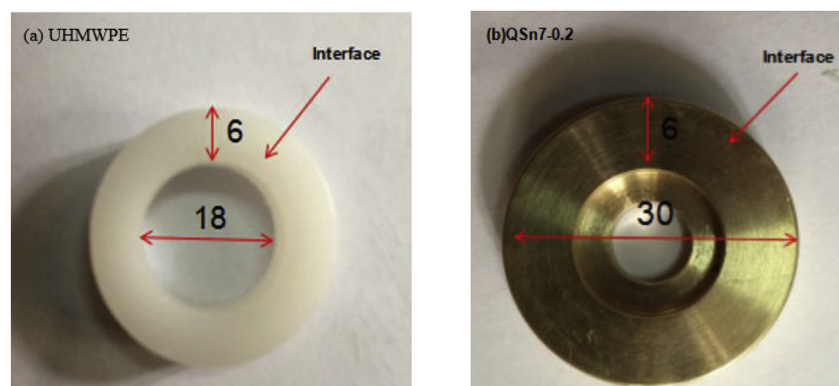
Images of the test samples: (a) UHMWPE specimen, and (b) QSn7-0.2 specimen.
